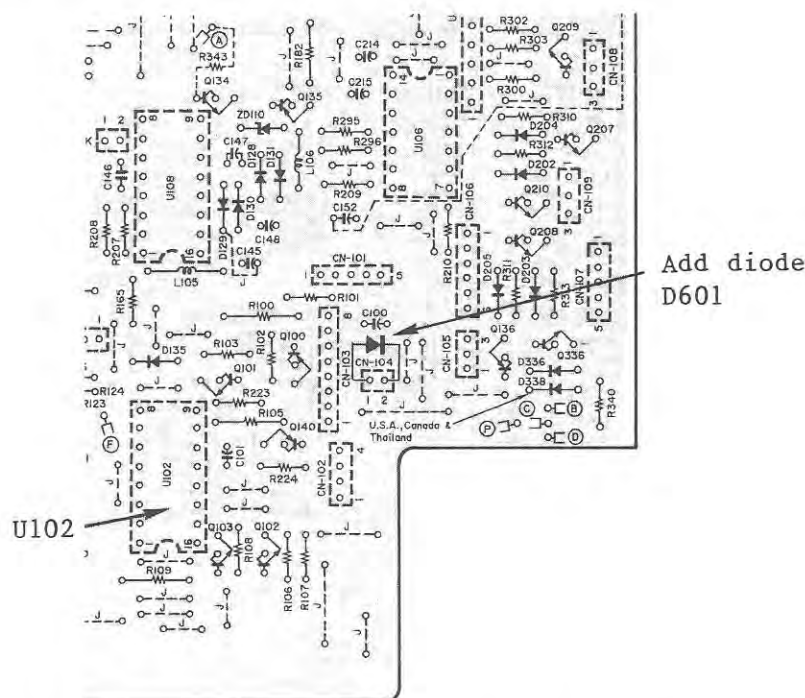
Main P.C.B. Ass'y (Dip Side View)
